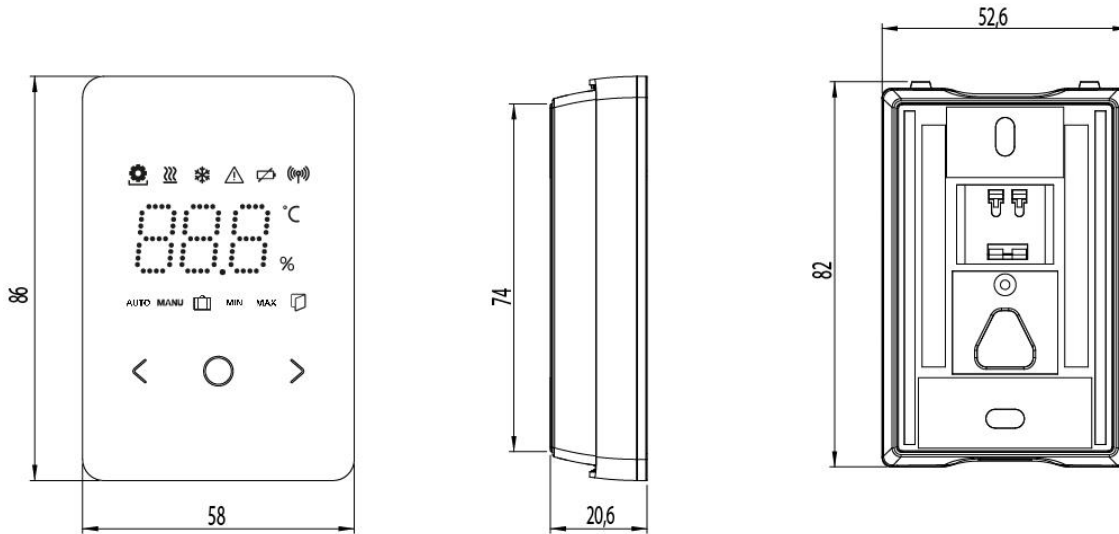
Dimensions of Room Control Unit LED (in mm)
